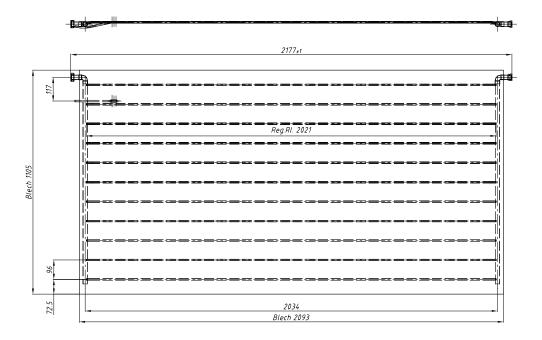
Drawing of absorber layout Collettore Solare Piano CP2XL
